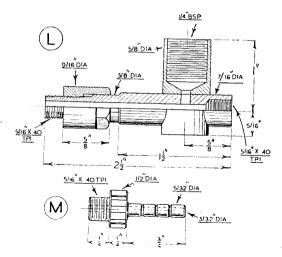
L—the outlet nozzle and T-piece; M—the alternative outlet union
